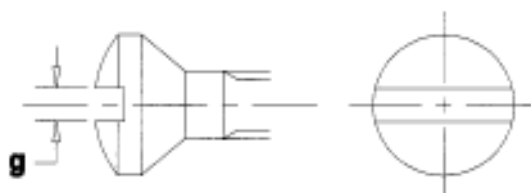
Schematic of Screw with Single-Slot Drive Connection (Table A7.1)
